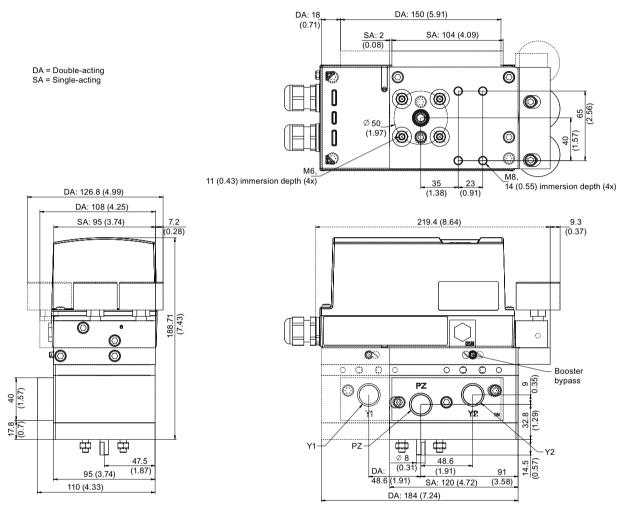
Dimension drawings booster mounted on positioner, dimensions in mm (inch)
